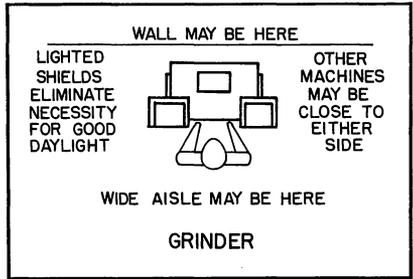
(Courtesy Rockwell Manufacturing Co.)
